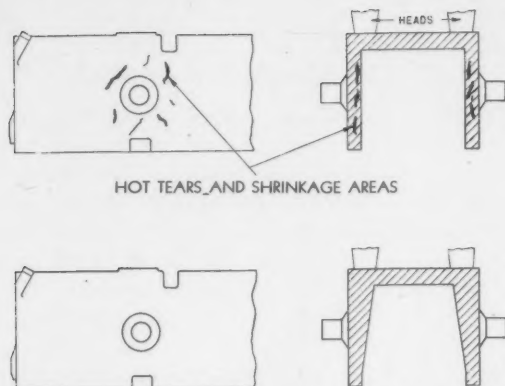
SECTIONAL SKETCH OF 5-INCH 38 CALIBER SLIDE CASTING. ILLUSTRATION SHOWS LOCATION OF INTERNAL DEFECTS LOCATED BY X-RAY AND CORRECTIVE CHANGE EMPLOYED.
